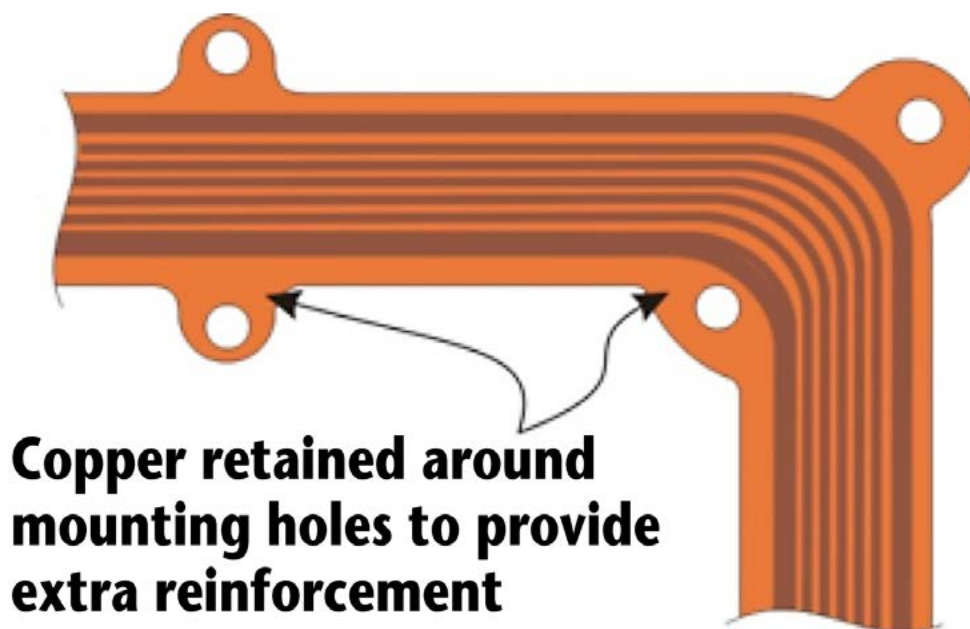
Mounting holes should retain copper when flex circuit is to be mounted without mechanical support. This is a more robust solution than unsupported polymer.
